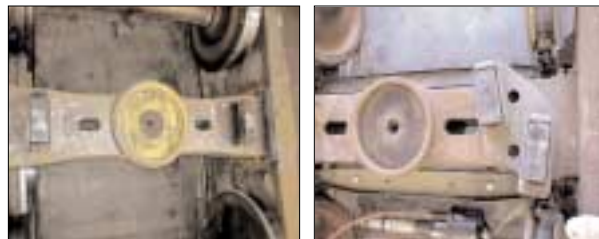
End and Intermediate Truck Side Bearing Configurations
